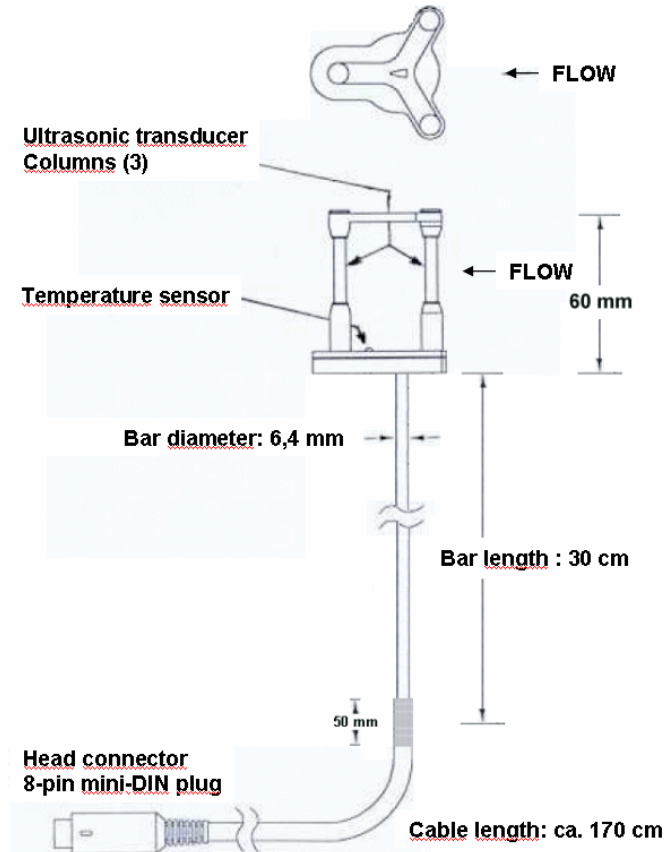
Ultrasonic anemometer sensor probe dimensions
